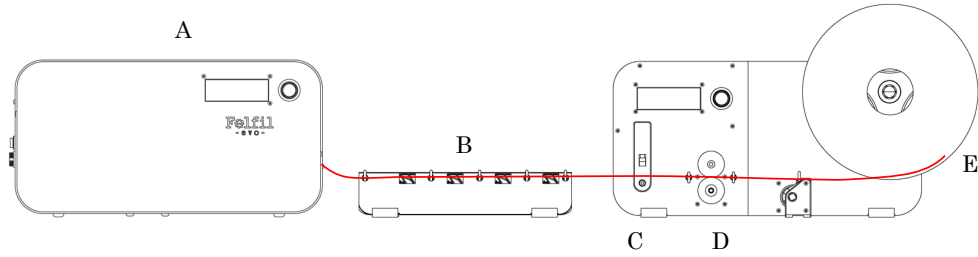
Extrusion process to fabricate PBAT filament: a) Single-screw extruder; b) Cooling region; c) Optical sensor; d) Pulling system to control the filament flux; e) Spooler.
